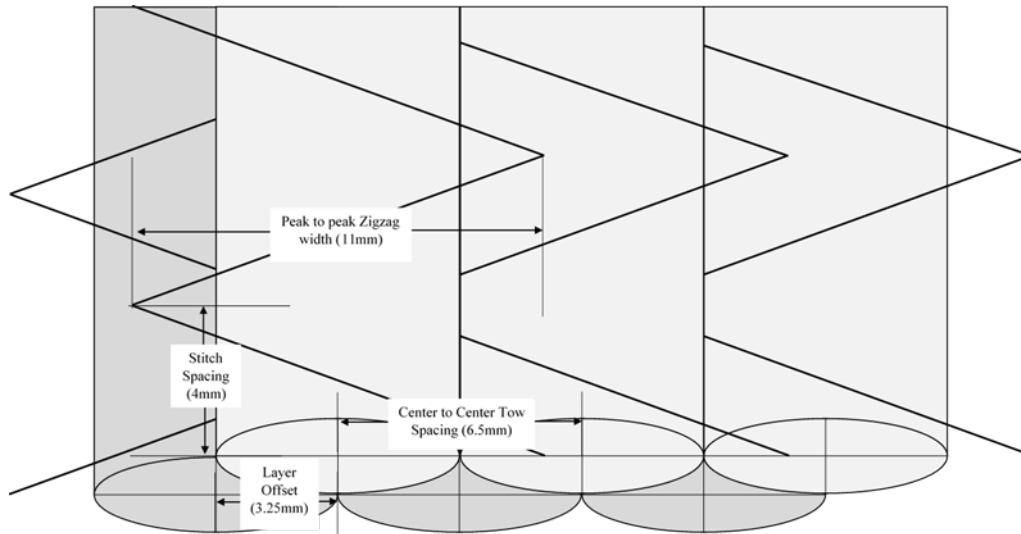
TFP Spacing Parameter Diagram for Polyester Holding Thread
